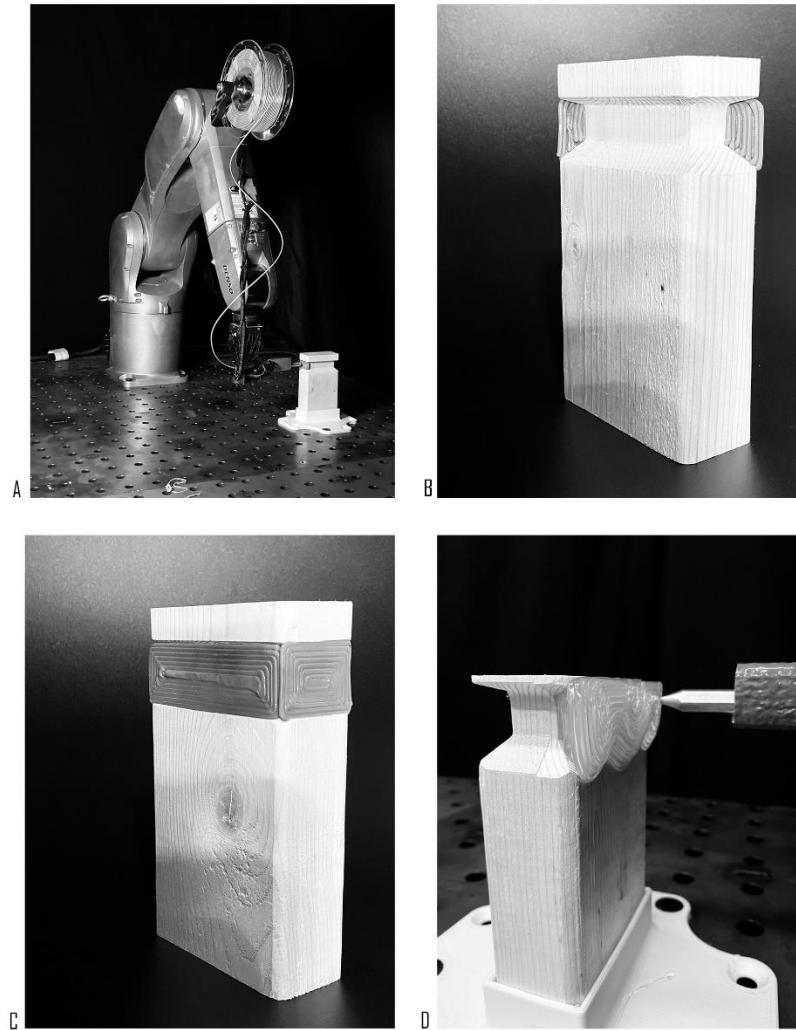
(A) Inverted dovetail robotic fabrication. (B) Partial completion of 3D print. (C) Completed Inverted dovetail print. (D) Detail image of 3D print.
